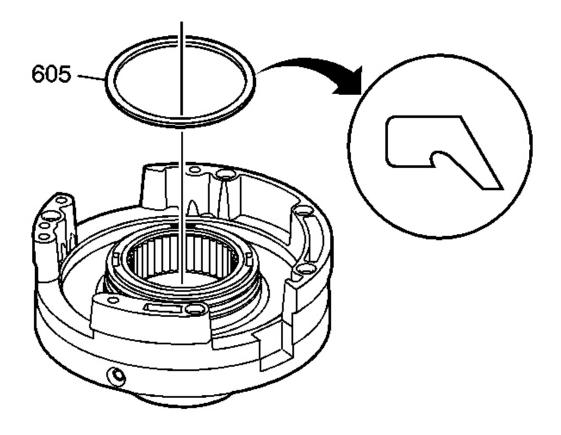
Identifying Fourth Clutch Piston Inner Seal Courtesy of GENERAL MOTORS CORP.
